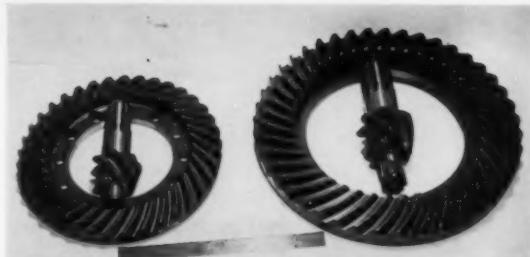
Two sets of carburized and hardened alloy steel axle differential, spiral bevel, ring gears and pinions made from fine grain chrome nickel alloy Krupp steel.
